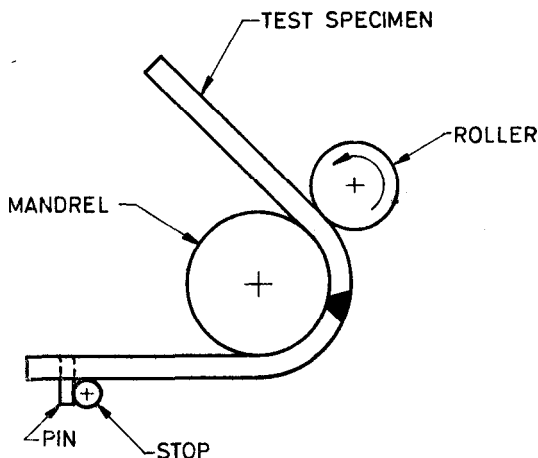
SCHEMATIC DIAGRAM OF CONTROLLED BEND TEST APPARATUS
